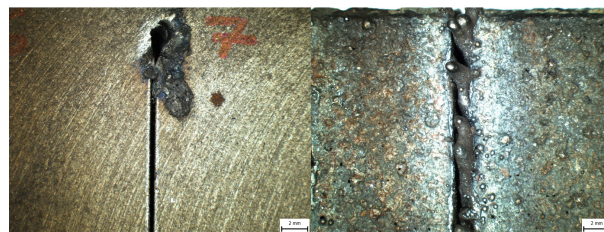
The resulting cut obtained with the given cutting parameters:
